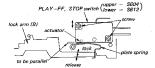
PLAY-FF, STOP switch (S604, 612) position adjustment
